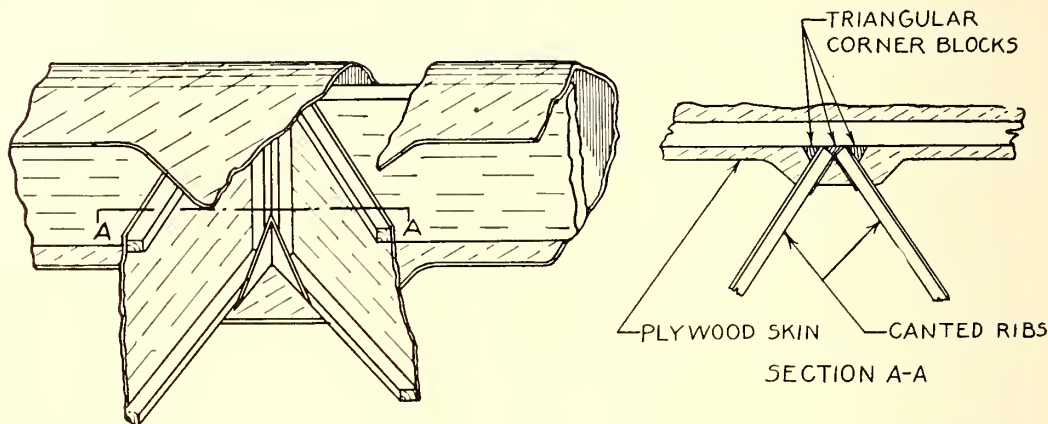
Typical Canted Rib to Spar Attachment
